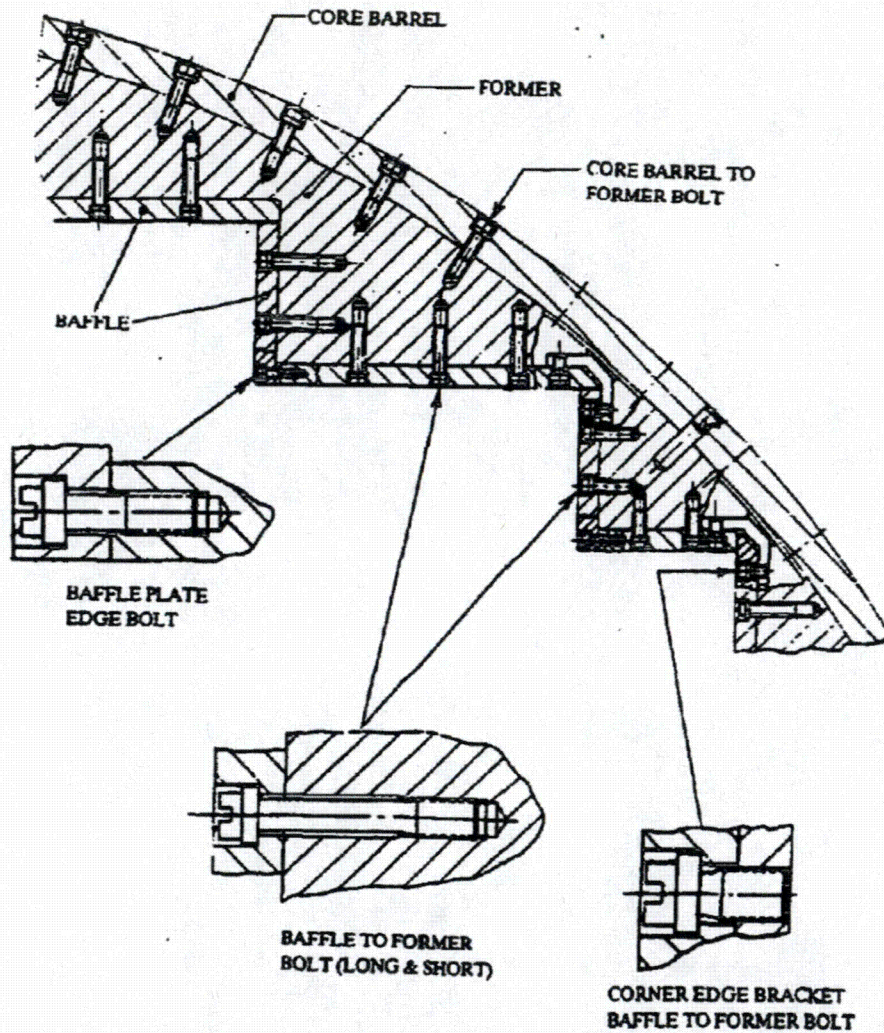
Bolting in a Typical Westinghouse Baffle-Former Structure
